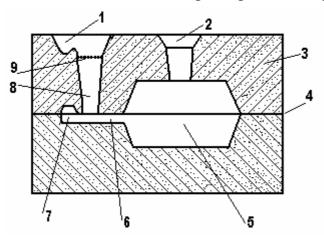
Gating system: 1 – pouring basin; 2 – vent pipe; 3 – sand mix; 4 – mould splitting; 5 – working cavity; 6 – feeder; 7 – slag catcher; 8 – pouring gate; 9 – ceramic filter
